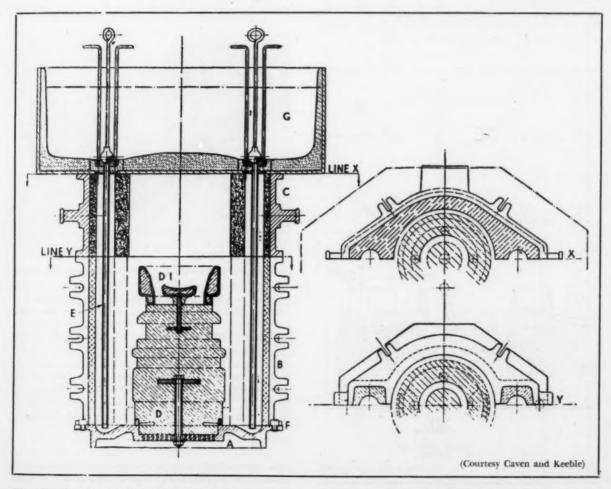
Method employed for production of large diesel engine piston. A.—Cast iron base plate. B.—Two-piece cast iron chill mold. C.—Sand-lined feed-
